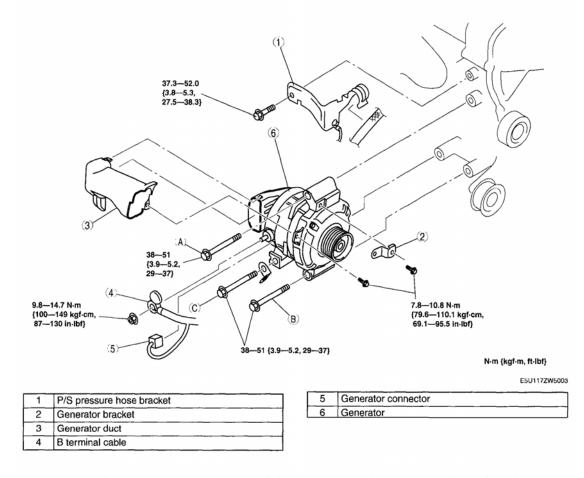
Identifying Removal Order Of Generator (With Torque Specifications) Courtesy of MAZDA MOTORS CORP.
